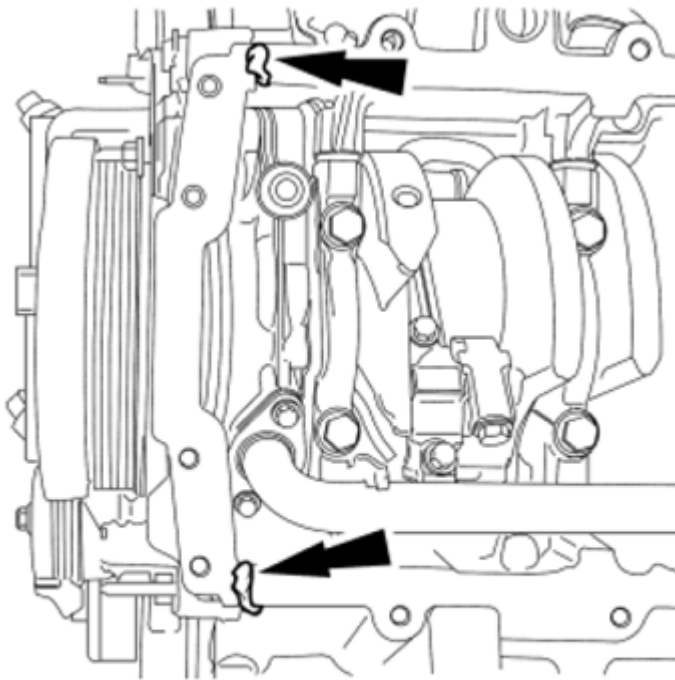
Locating Crankshaft Rear Seal Retainer Plate-To-Cylinder Block Sealing Surface
